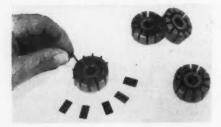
Close-up view of the rotors finished on automatic grinder shown in Fig. 1.
